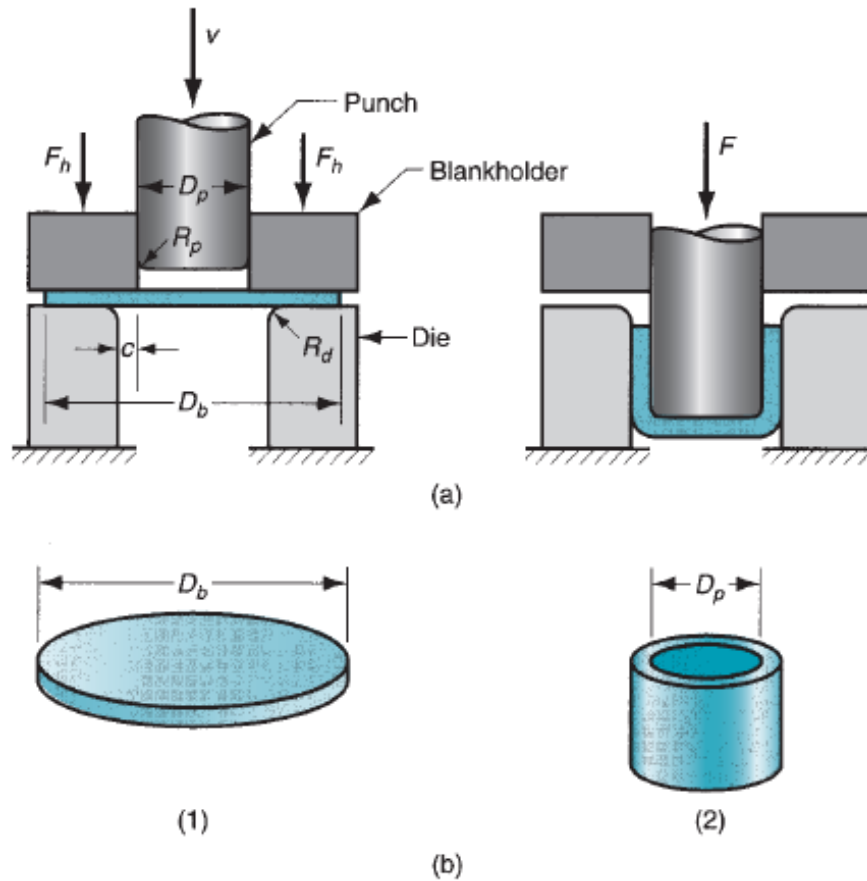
(a) Drawing of a cup-shaped part: (1) start of operation before punch contacts work, and (2) near end of stroke; and corresponding workpiece: (1) starting blank (2) drawn part (Groover, 2012)
